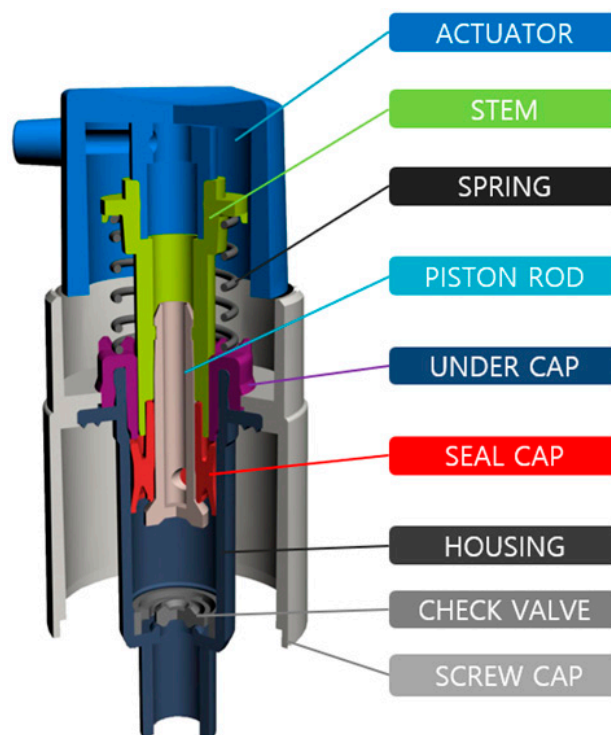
Schematic of the cosmetic dispenser pump assembly. This exploded, cross-sectional view illustrates the main components and their assembly order. The figure highlights the location and functional importance of the SealCap (the component of interest in this study), which is critical for creating the internal seal required for consistent product discharge.
